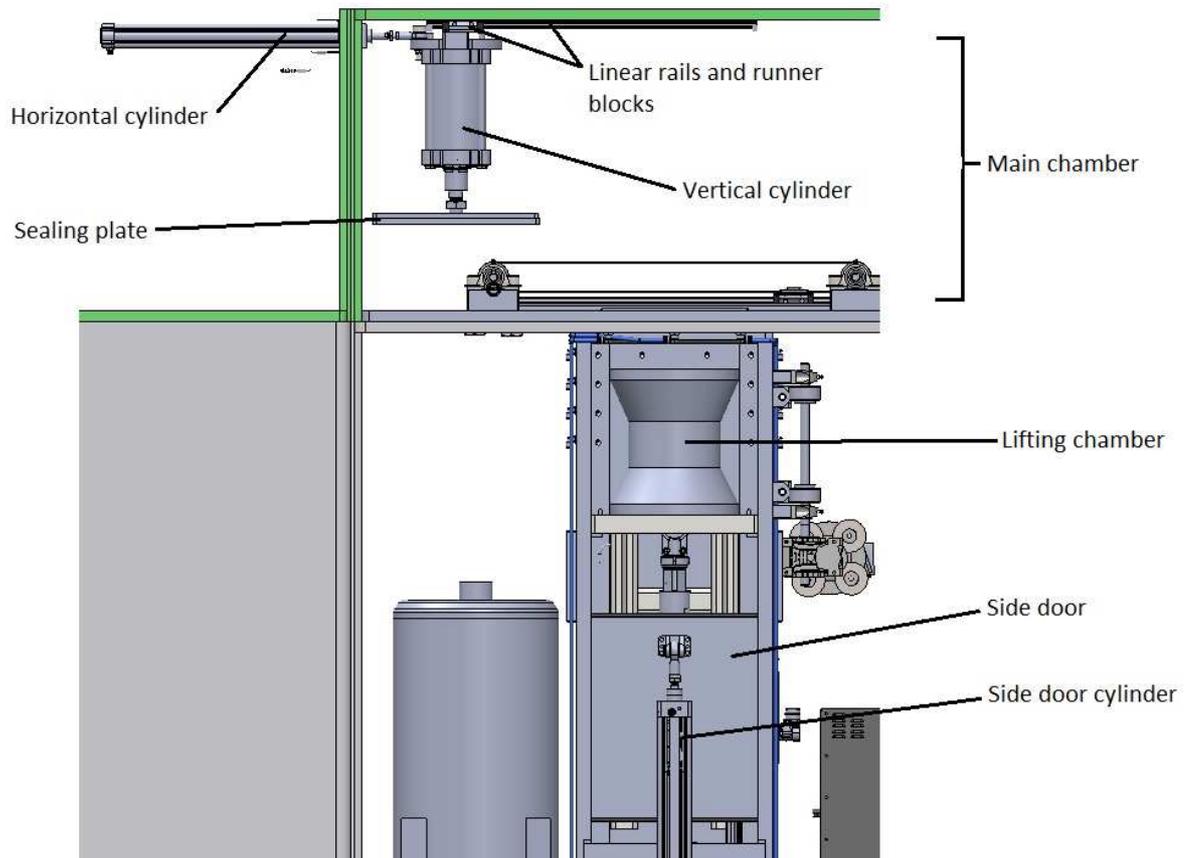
Position of the chamber, sealing plate and side door hole.
